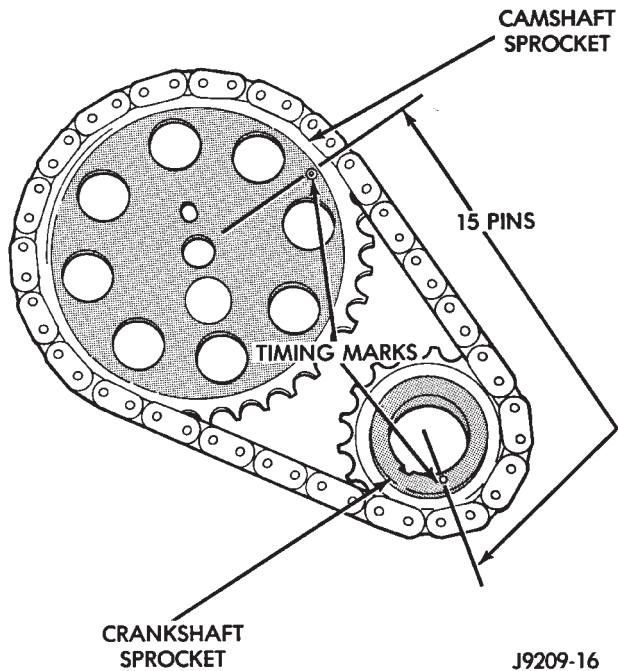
Verify Crankshaft/Camshaft Installation—Typical
